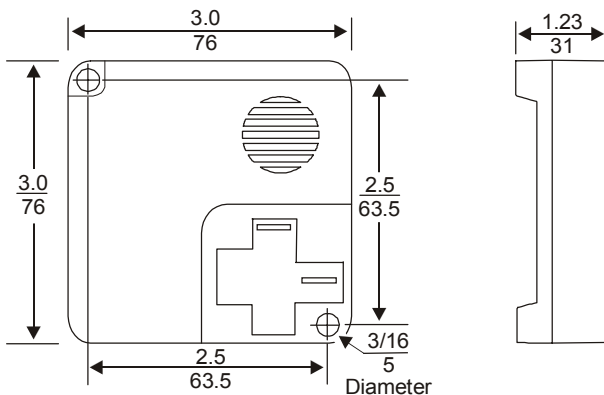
TE-637DP-1 Dimensions, in. (mm)
